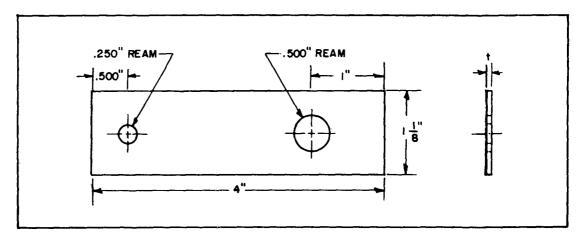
Sheet Bearing Test, Specimen-Bearing Ratio e/D - 2.0
